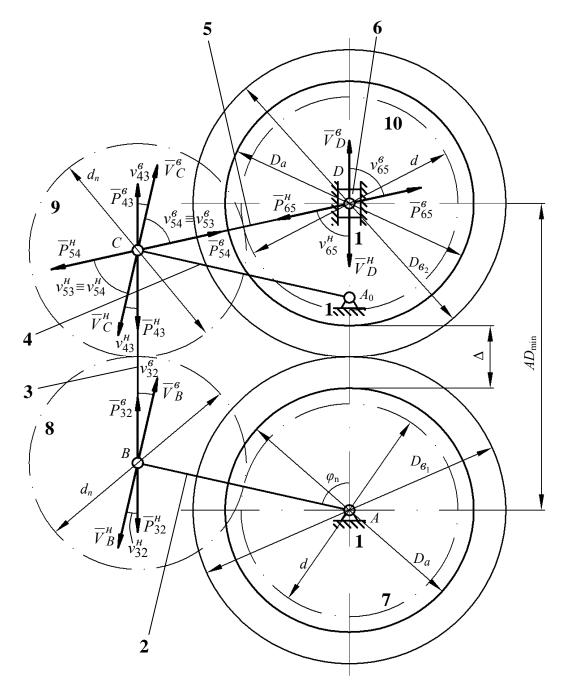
Design scheme of synthesis of tooth-lever gear mechanism with parallelogram lever contour. 1 – fixed post, 2, 3, 4, 5 – levers, 6 – slider, 7 – drive tooth wheel, 8, 9 – intermediate tooth wheels, 10 –driven tooth wheel
